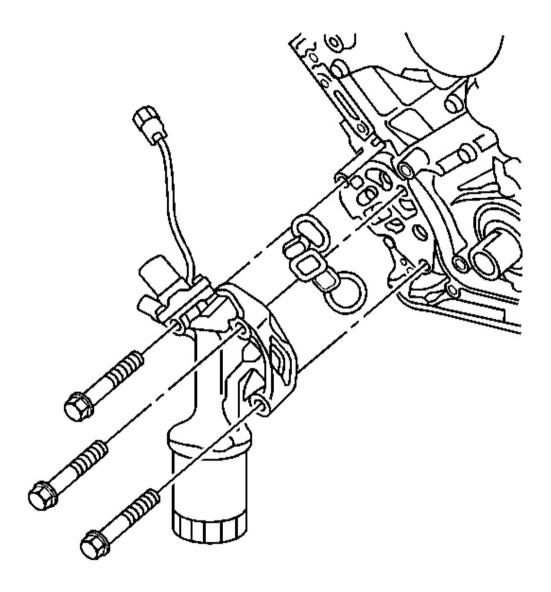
View Of Rocker Arm Oil Solenoid Valve Courtesy of GENERAL MOTORS CORP.
